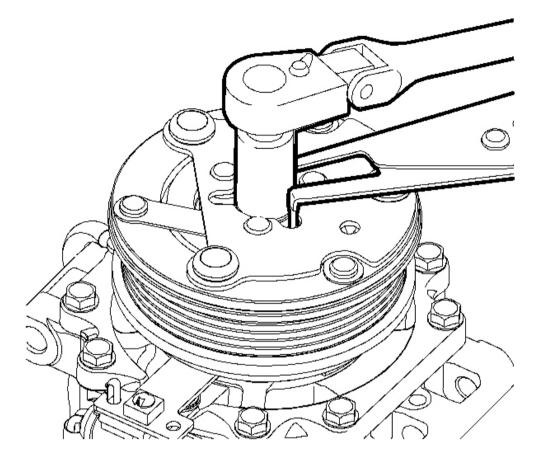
Clutch Nut, Disk & Hub Assembly Courtesy of GENERAL MOTORS CORP.
